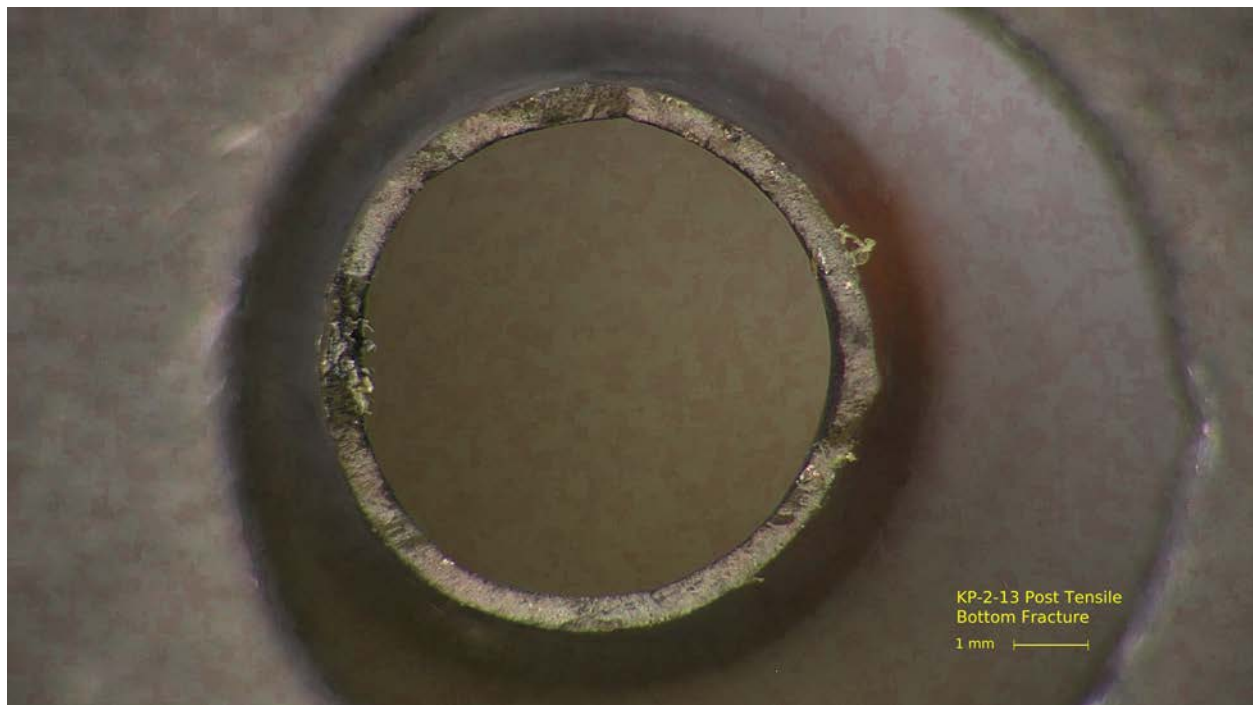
Post-Tensile Image Bottom Fracture for KP-2-13
